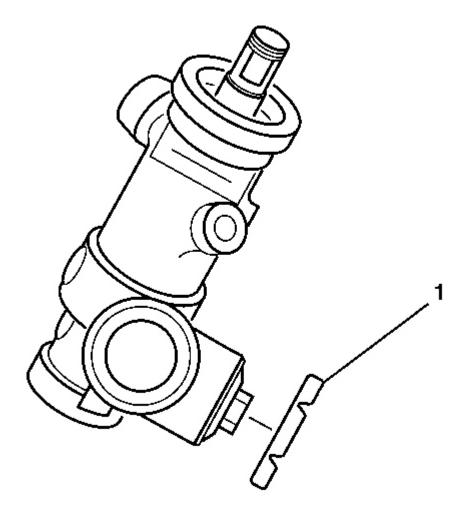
View Of Adjuster Plug Lock Nut (Rack & Pinion) Courtesy of GENERAL MOTORS CORP.
